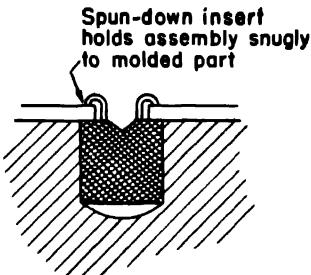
Insert for assembling a mating part snugly to a molded part.
